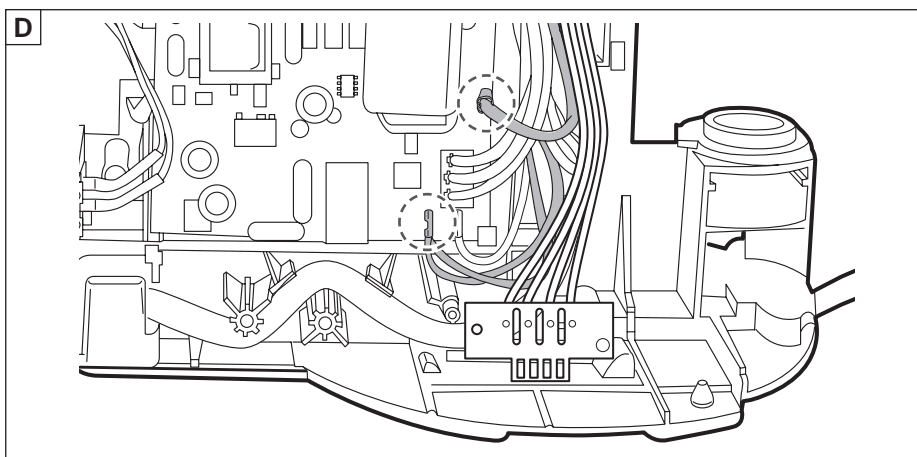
Figure D: reposition the machine upright and remove the two thermoblock power cables from the CPU BOARD.
